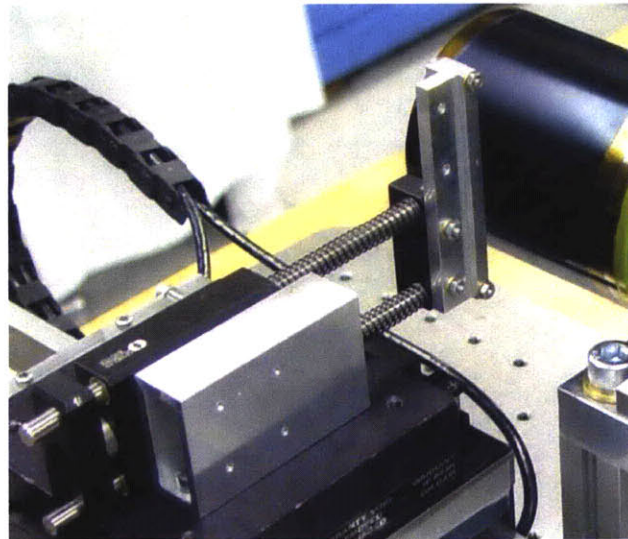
An early design which preloaded the blade against the crucible surface using a spring-loaded, sliding bearing stage.
